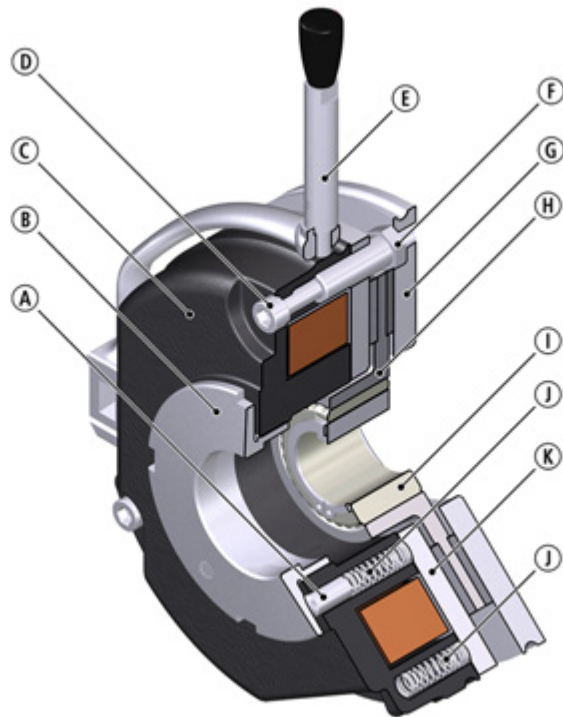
Design of the INTORQ BFK458 spring-applied brake: Basic module E (complete stator) + rotor + hub + flange
